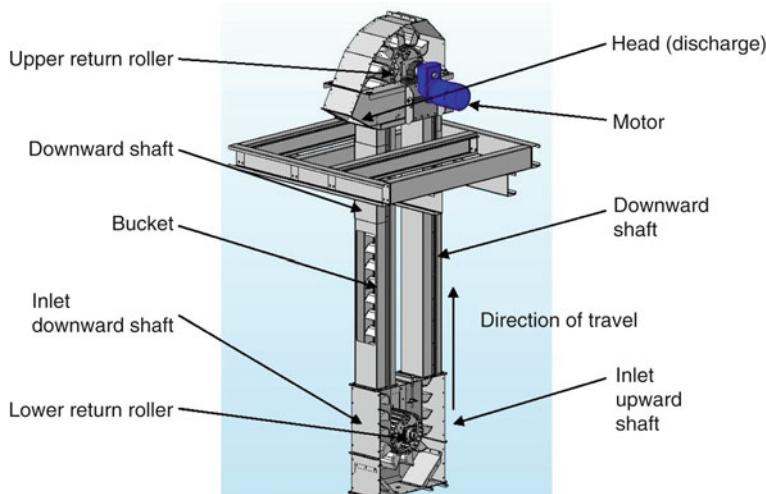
3D view of a bucket elevator by Salamatec [6]
